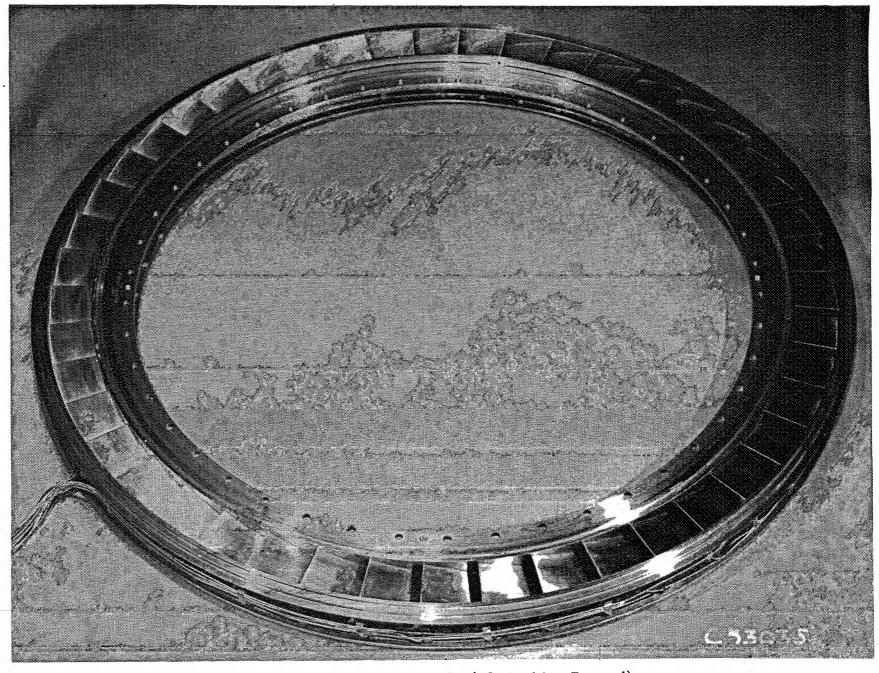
Stage 1 Nozzle Assembly (Aft Looking Forward)
